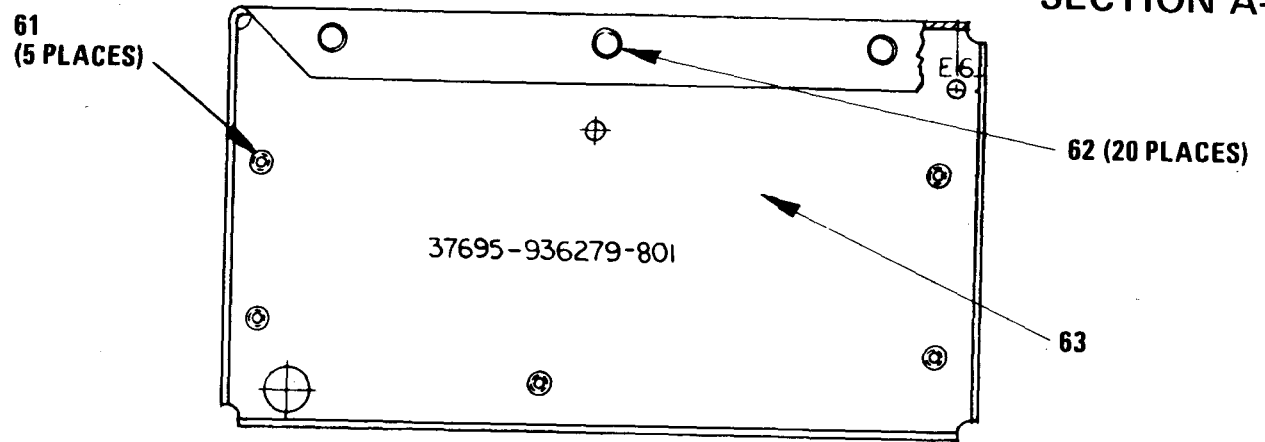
Electronic Component Assembly (Sheet 3 of 4)
